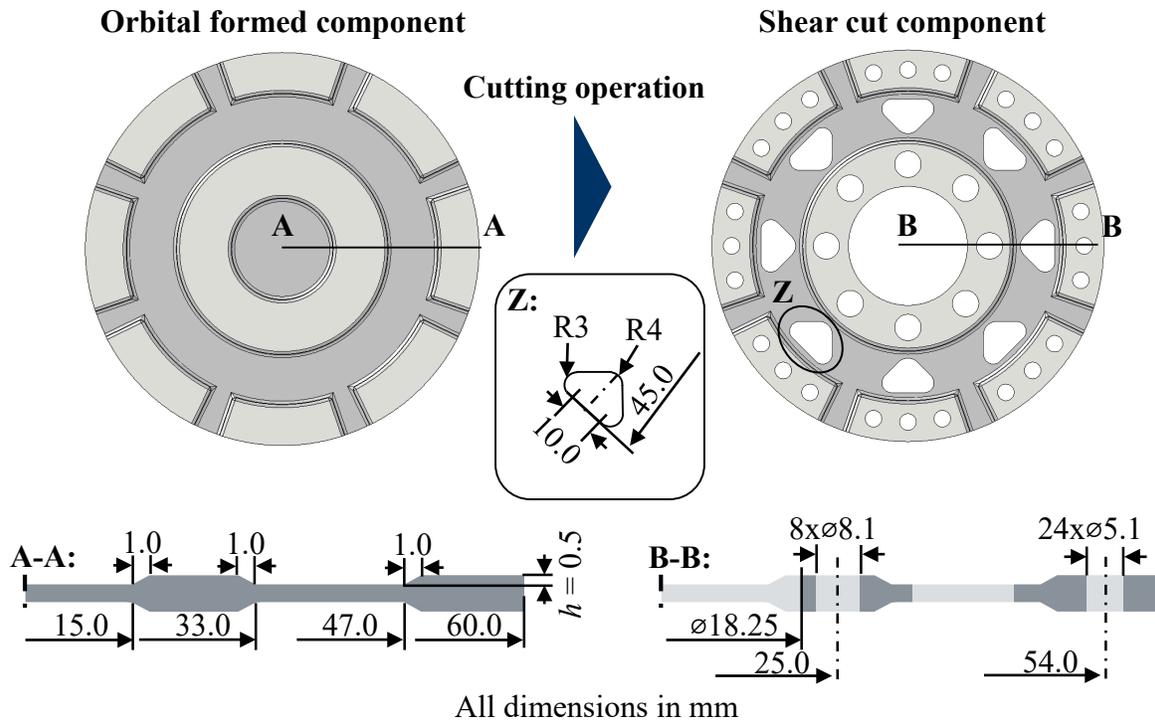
Geometrical dimensions of the component after orbital forming and cutting
